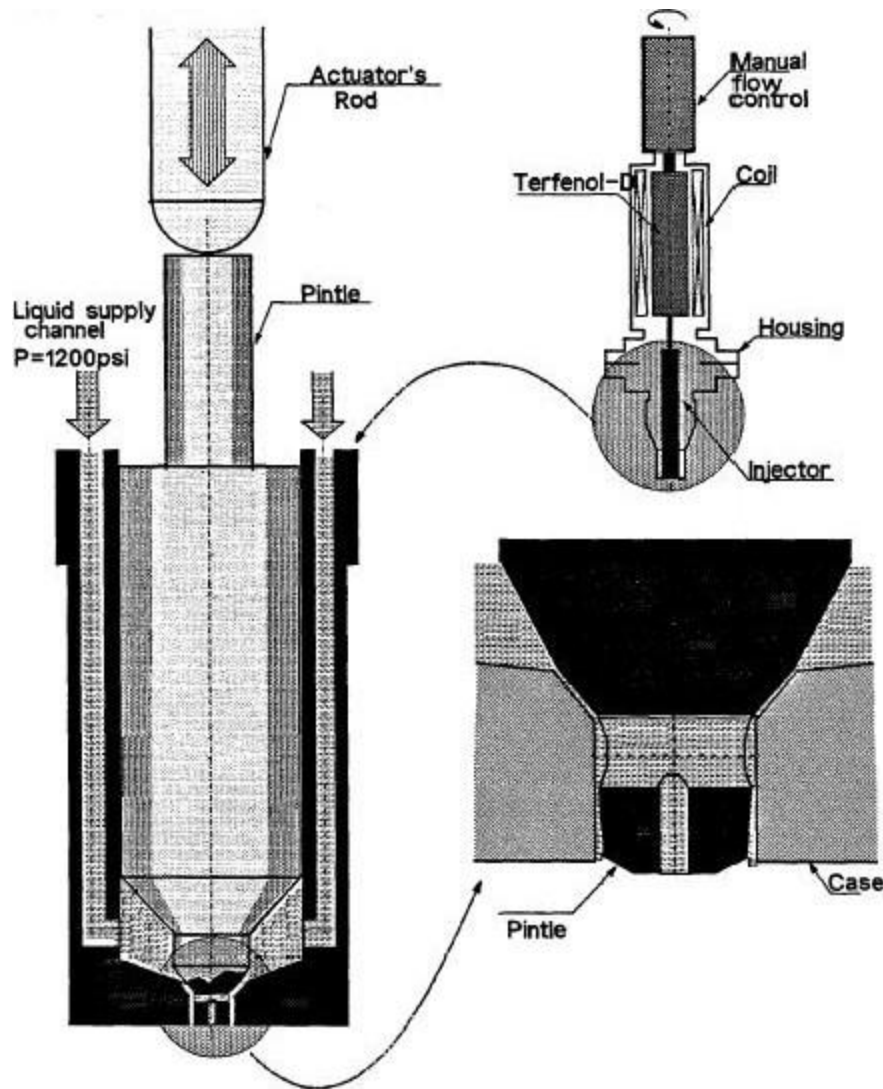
Drawing of the fuel injection system used by Neumeier et al. [33].
